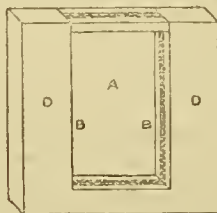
FRONT VIEW OF SHUTTER WITH EXTRA SLIDE A.
